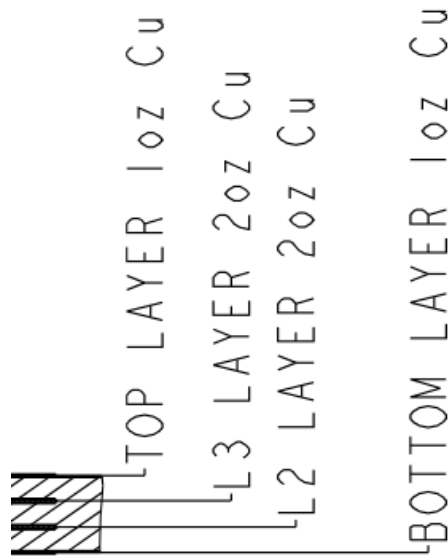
An Example of PMM Host Current Rating Test Board PCB Layer Stack
